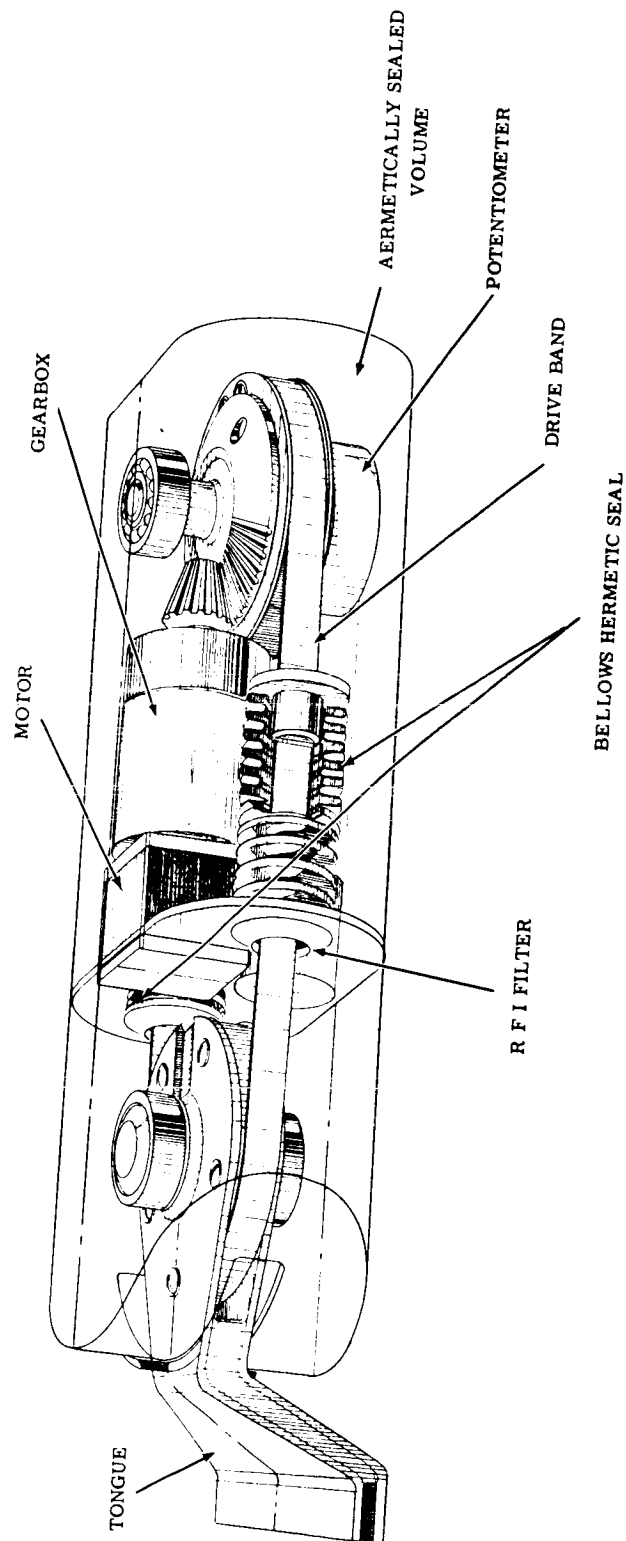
Alternate Steering Actuator Configuration, Mechmetals Design
